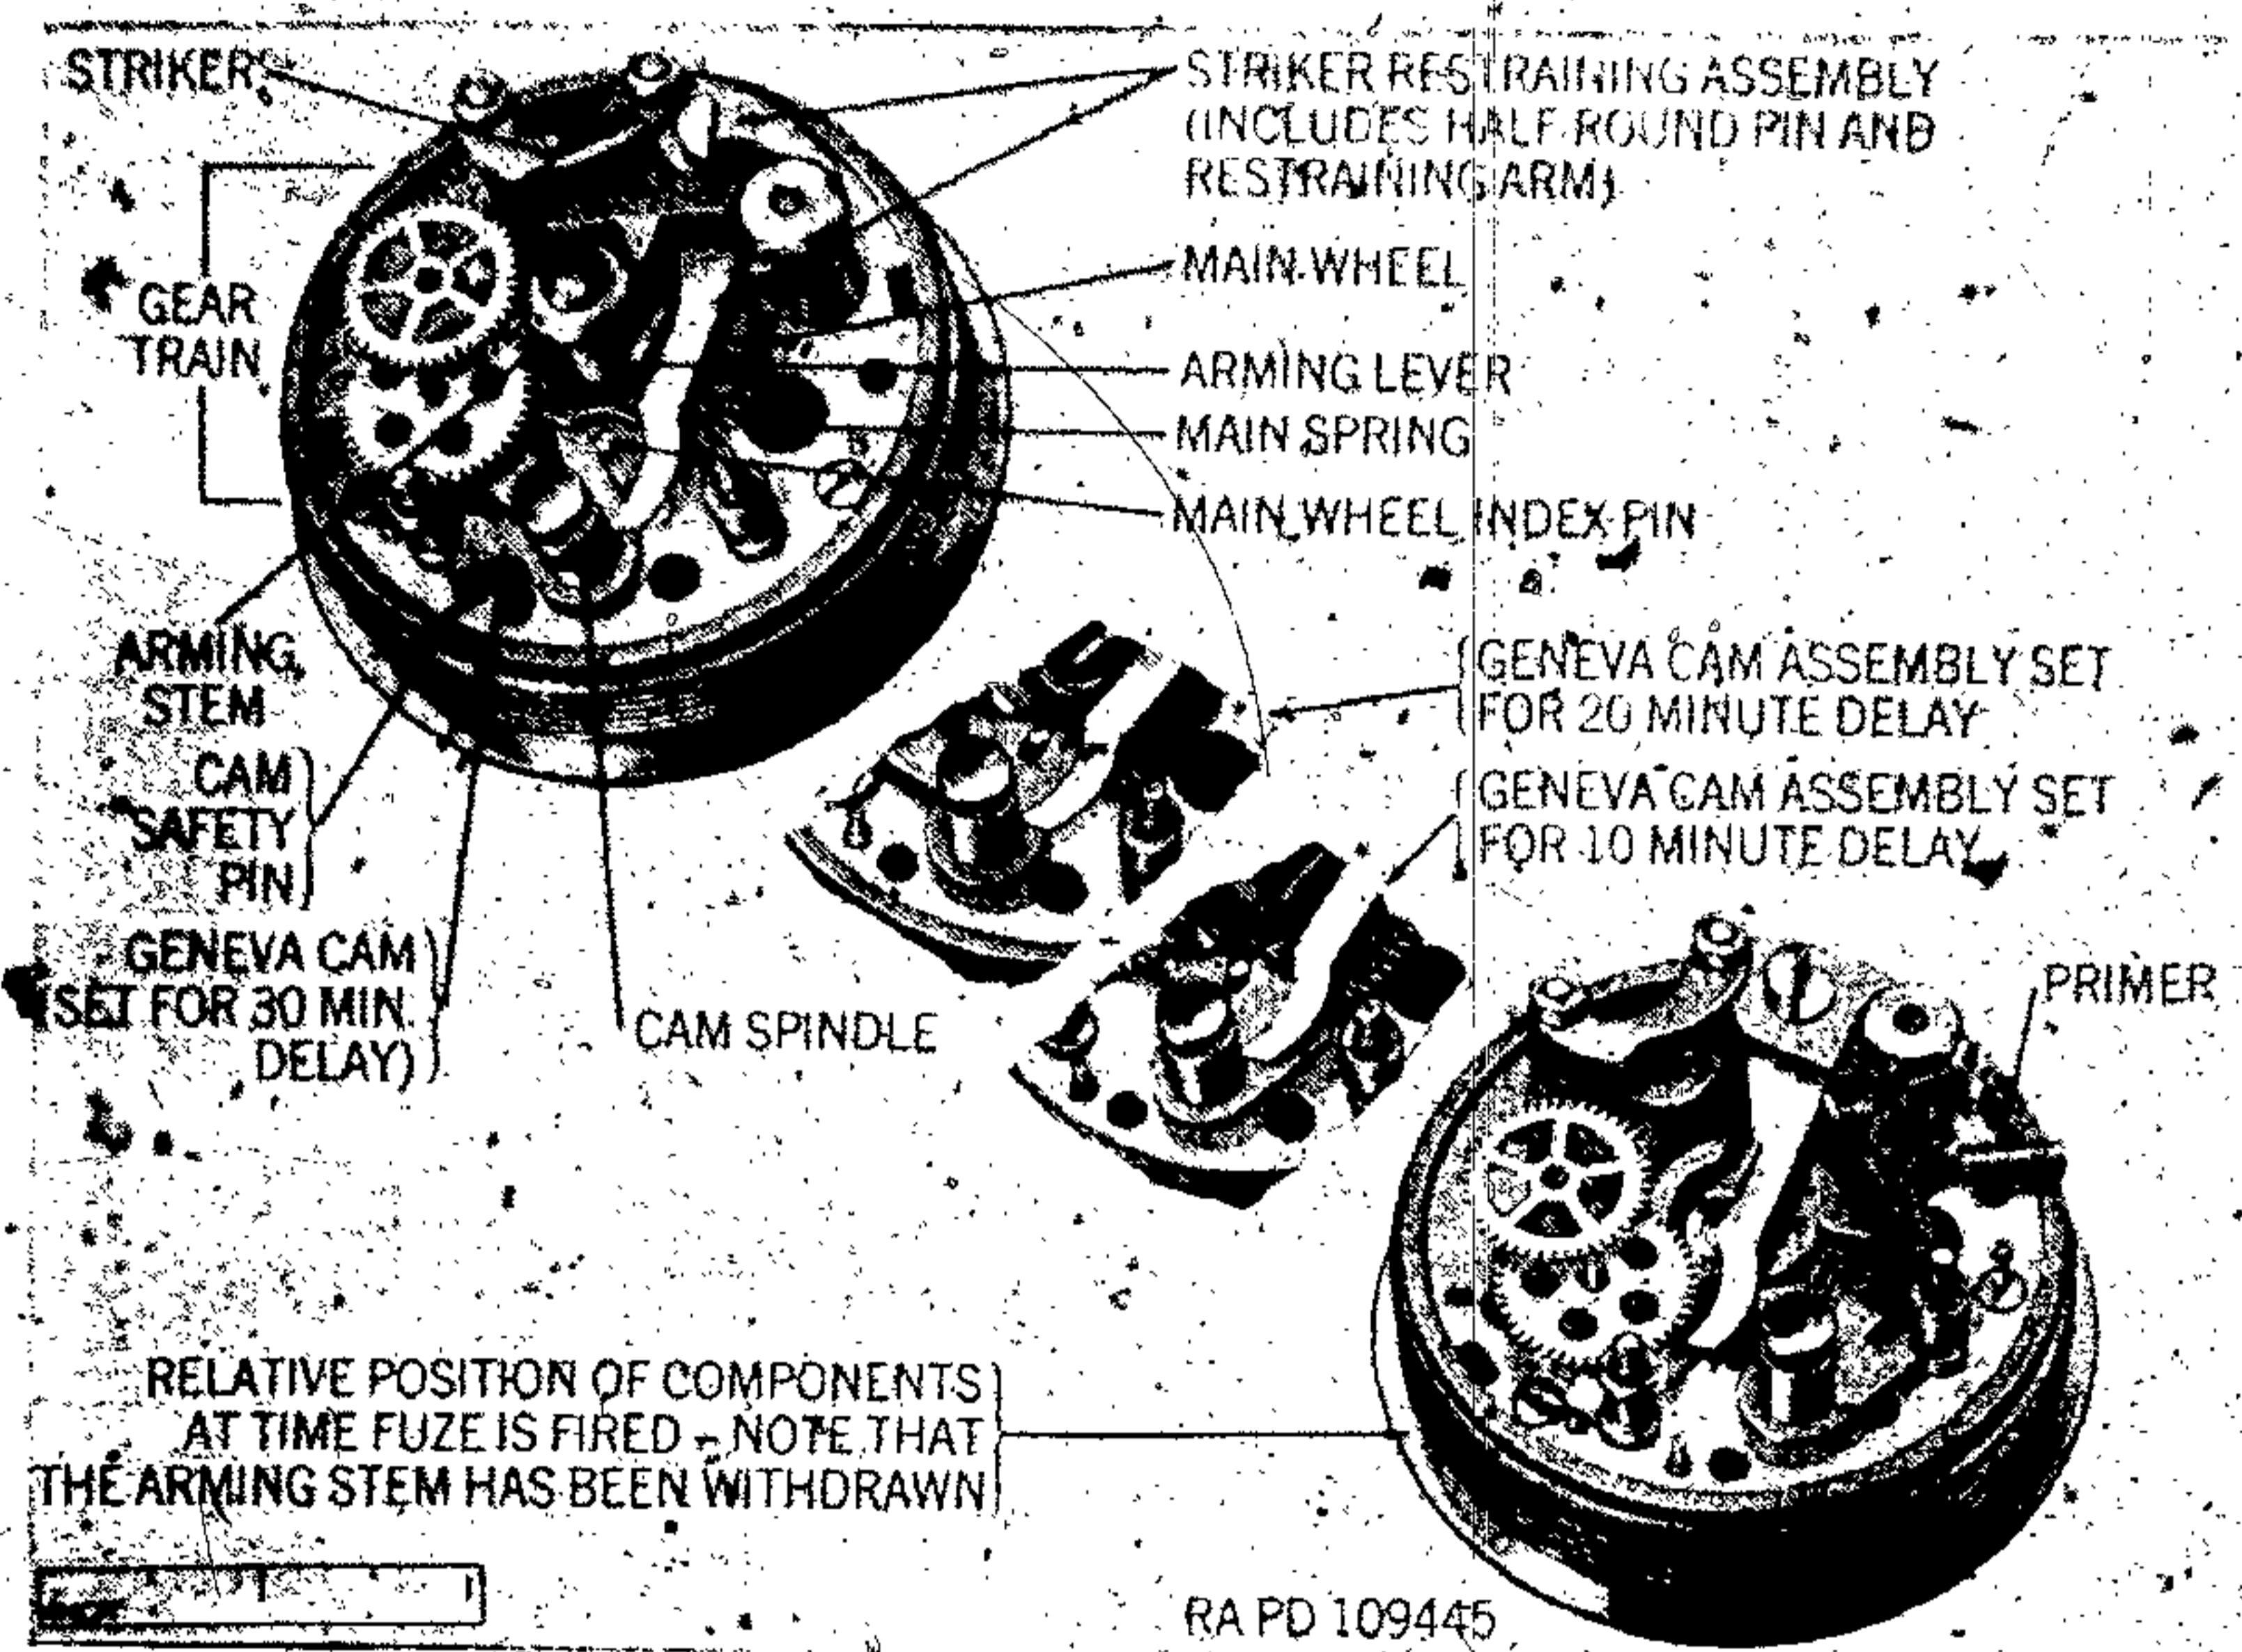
M130 (T48) Bomb fuze—time mechanism.
